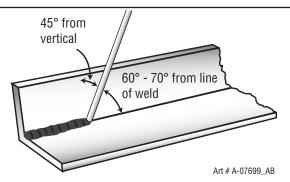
Electrode Position for HV Fillet Weld
